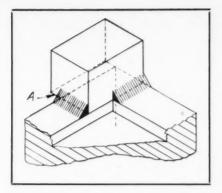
Drawing showing method of welding steel block to base plate to provide for one, two, or three way support.
